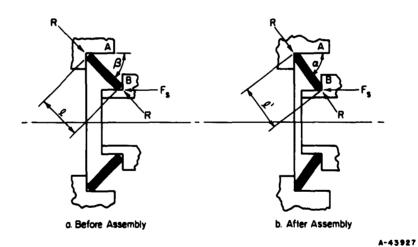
SEATING ACTION OF MECHANICAL TOGGLE SEAL
